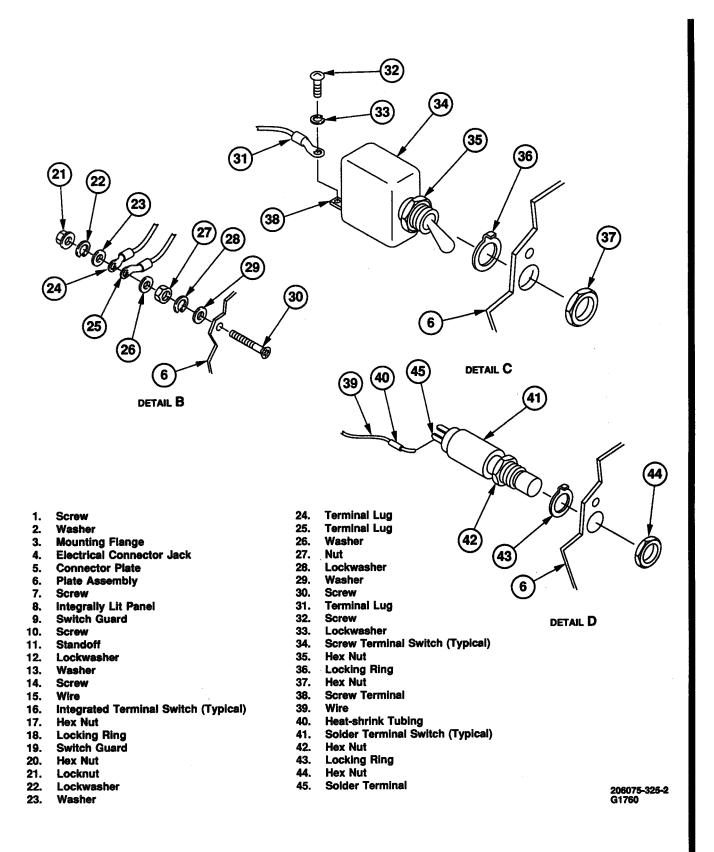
Disassembly – ATAS Control panel (Sheet 2)
